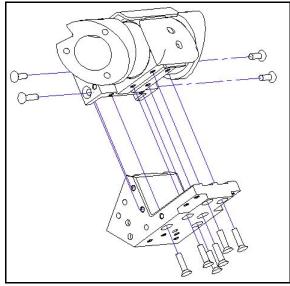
Pelvis Base Module/ Load Cell Mounting Plates assembly
